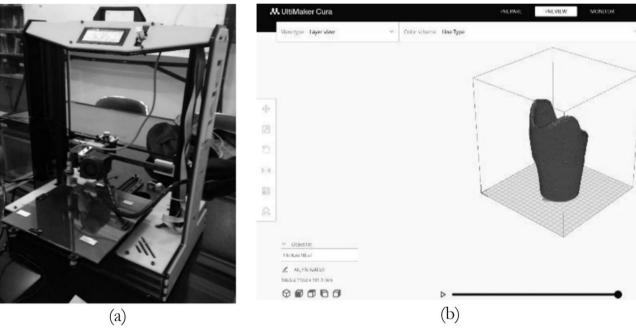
(a) 3D Printer Prusa I4 Sunhokey; (b) 3D Printing Process Setup Preparation
